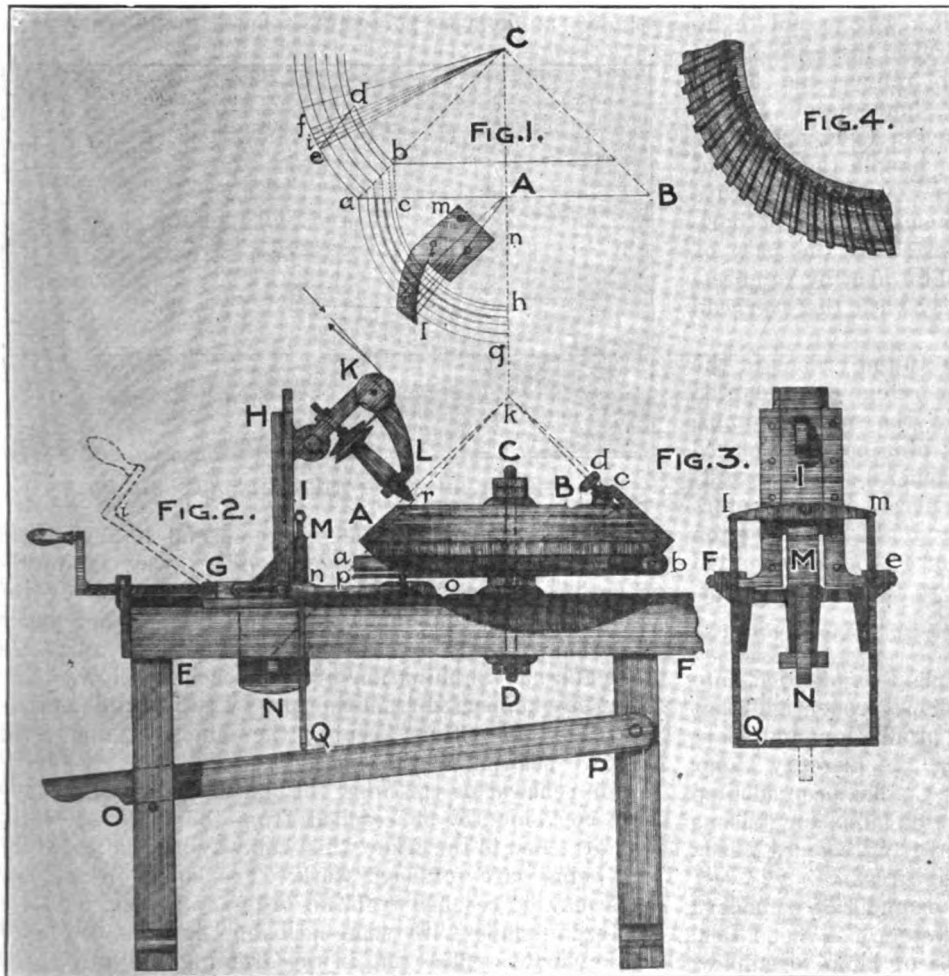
CONSTRUCTION OF THE SPIRAL. FIGS. 2 AND 3. THE GEAR CUTTING MACHINE. FIG. 4. SKETCH OF PART OF A SPIRAL BEVEL-GEAR
